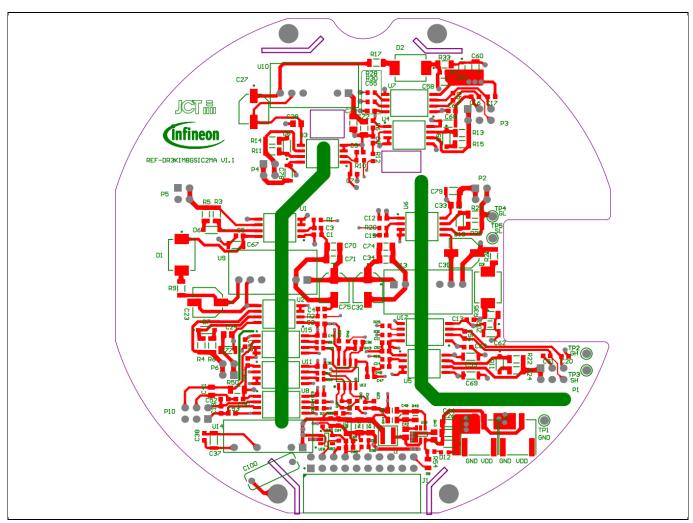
The layout of the driver board (REF-DR3KIMBGSIC2MA)
